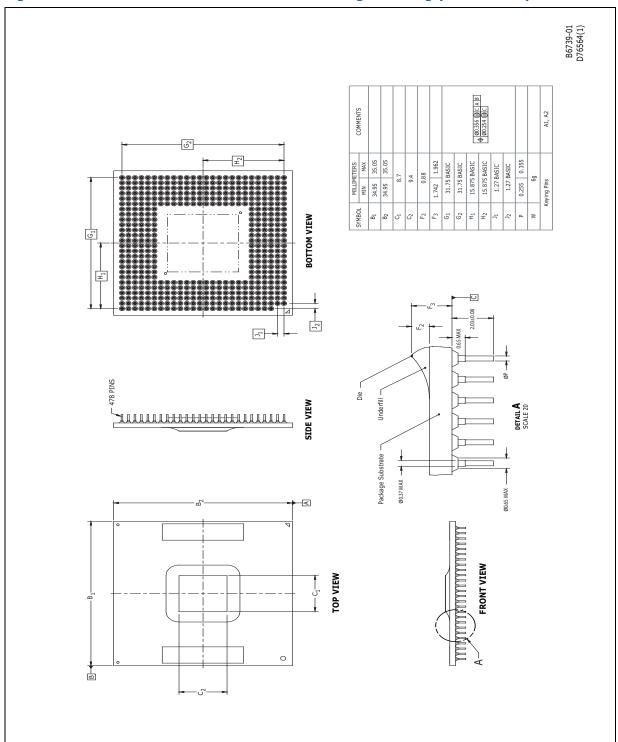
3-MB Die Micro-FCPGA Processor Package Drawing (Sheet 2 of 2)
